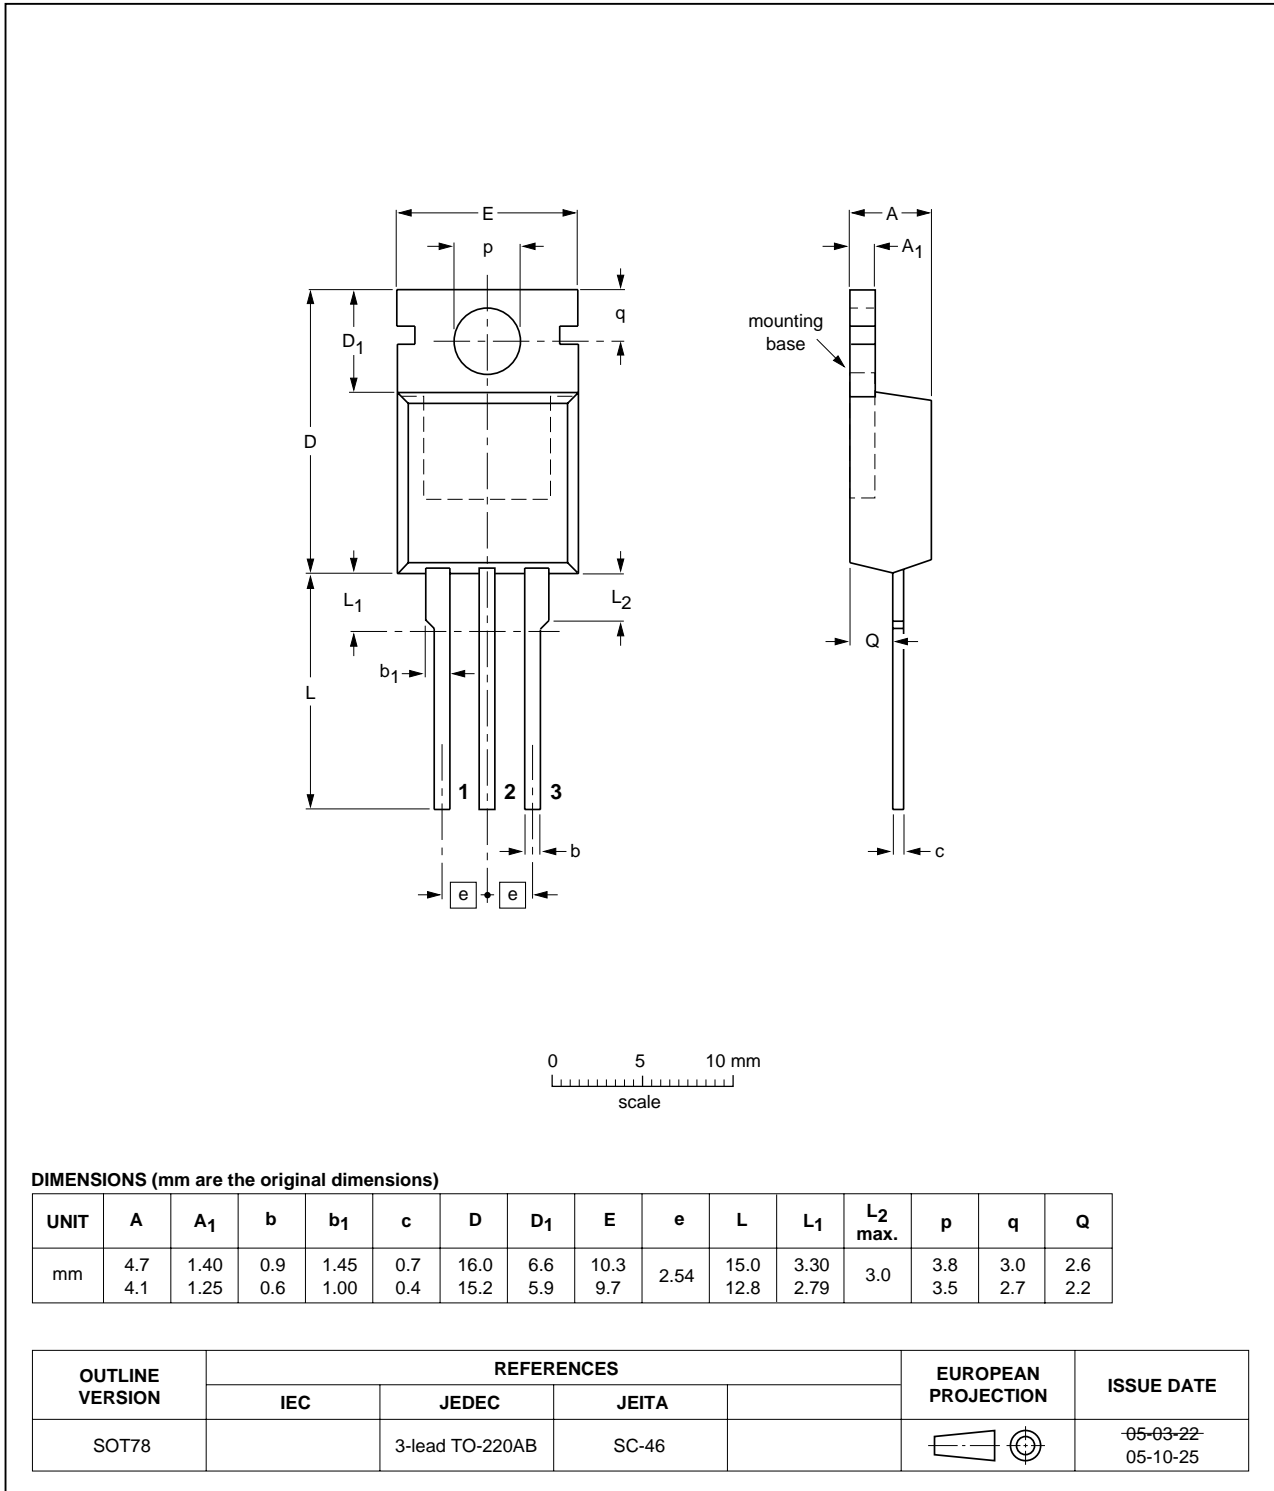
Package outline SOT78 (3-lead TO-220AB)
